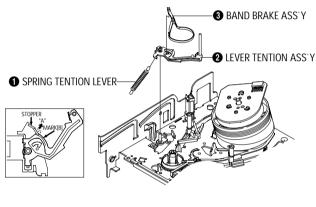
Lever Tension Ass'y, Band Brake Ass'y Removal
